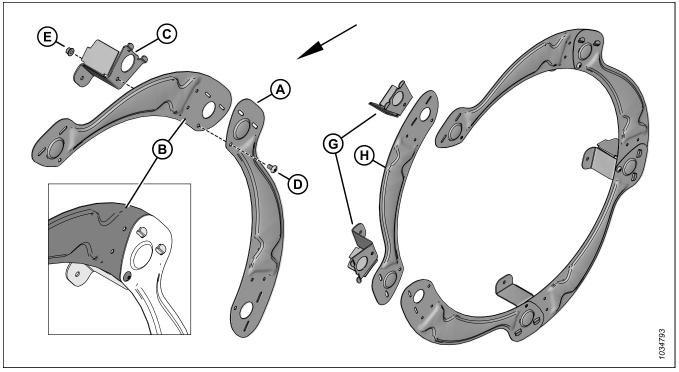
Five-Bat Reel – Initial Endshield Assembly
